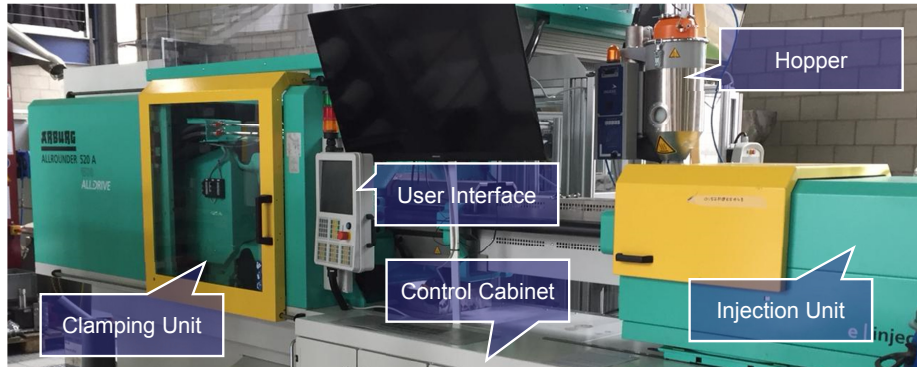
The ARBURG Allrounder 520 injection molding machine from the example.
